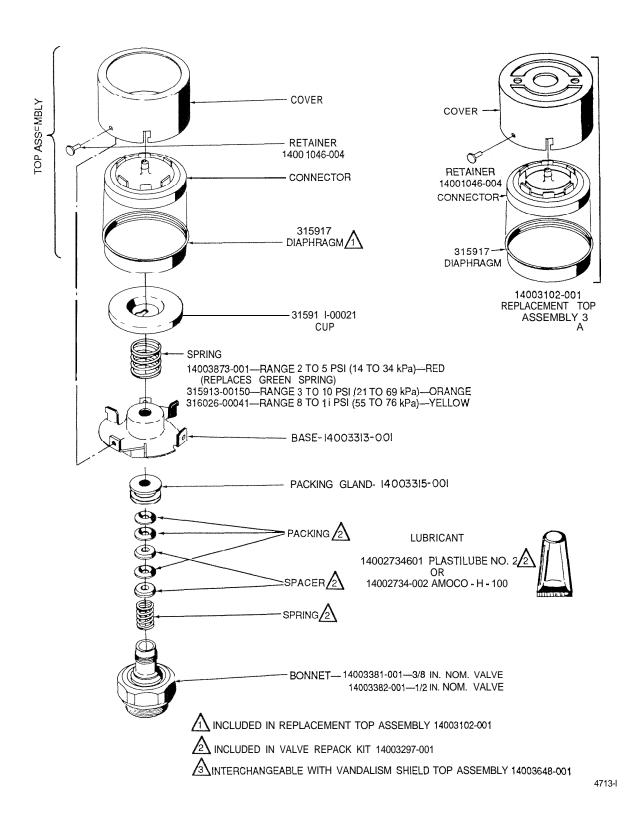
Exploded View of Series 3 VP526A Valve Packing and Top.
